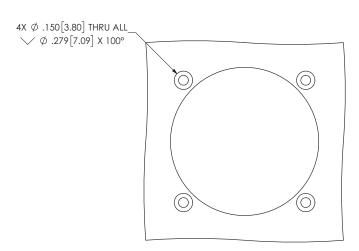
GSB 15 Panel Cutout Drawing w/Pan Head Screws (011-05043-00 and -01 Mounting Kits)
